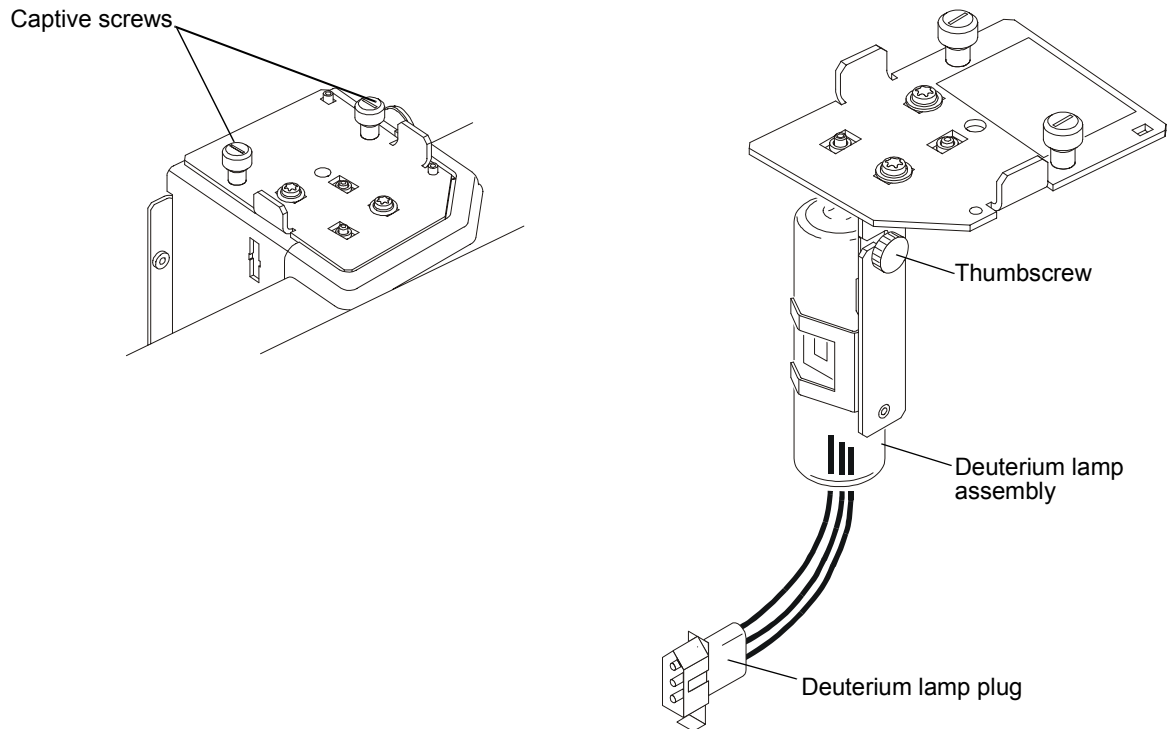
Deuterium Lamp Cover and Bracket Assembly
